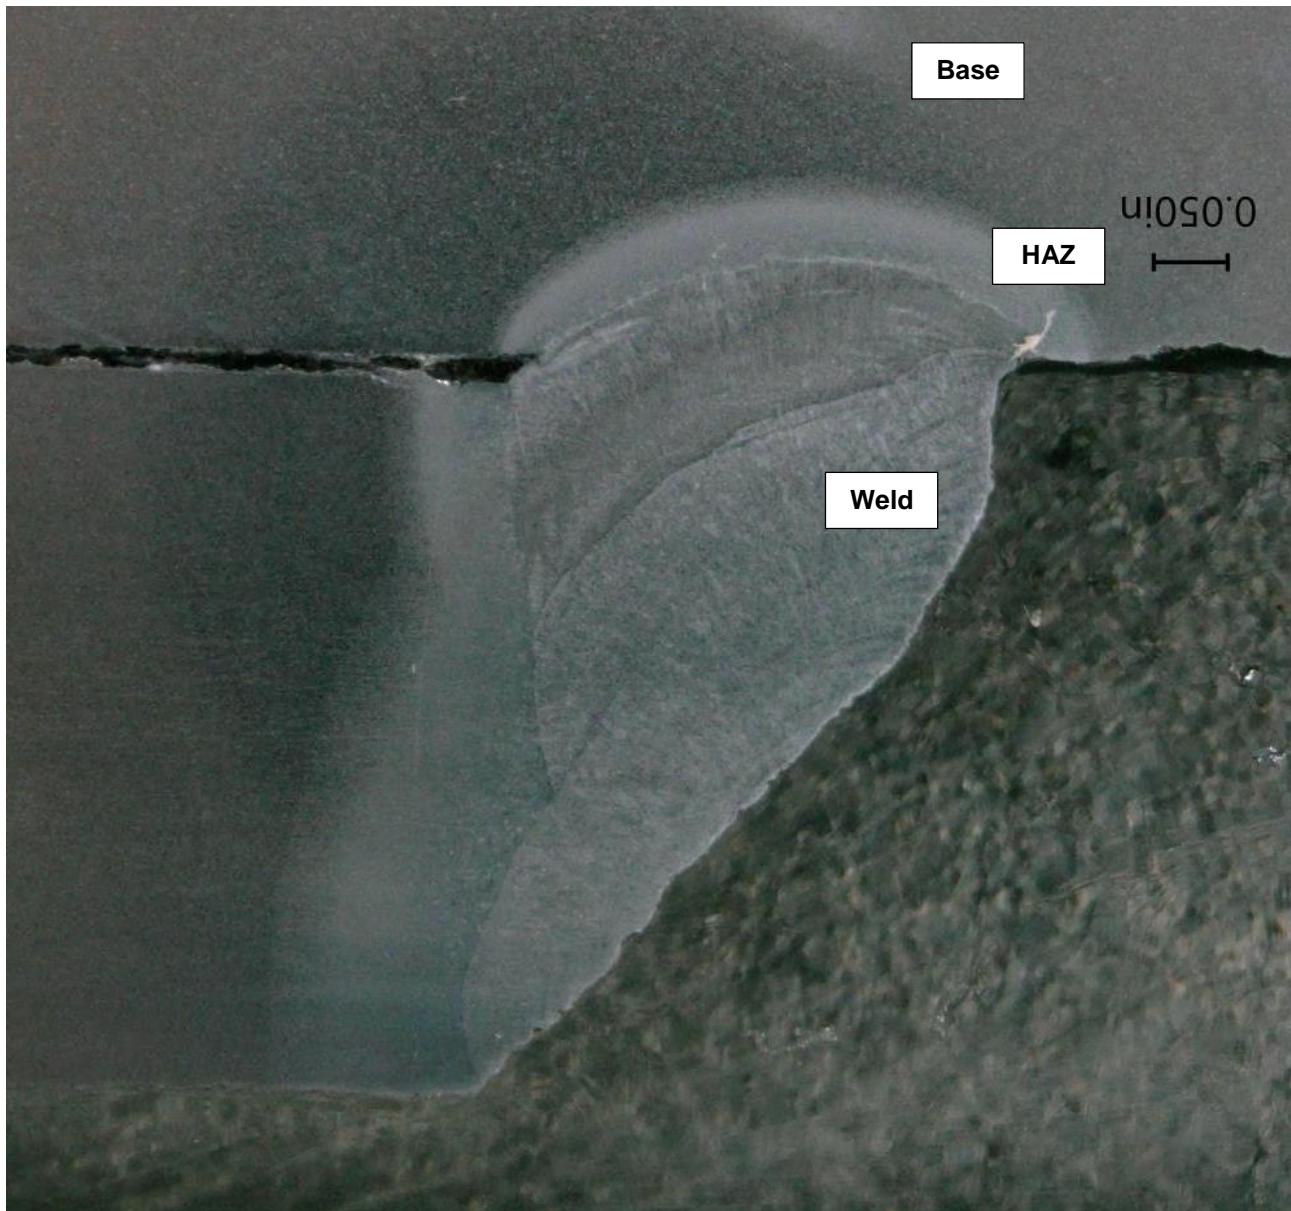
Optical micrographs of the microstructure of the B end right side original manufacturer weld. Sample B10, 2% Nital etch.
